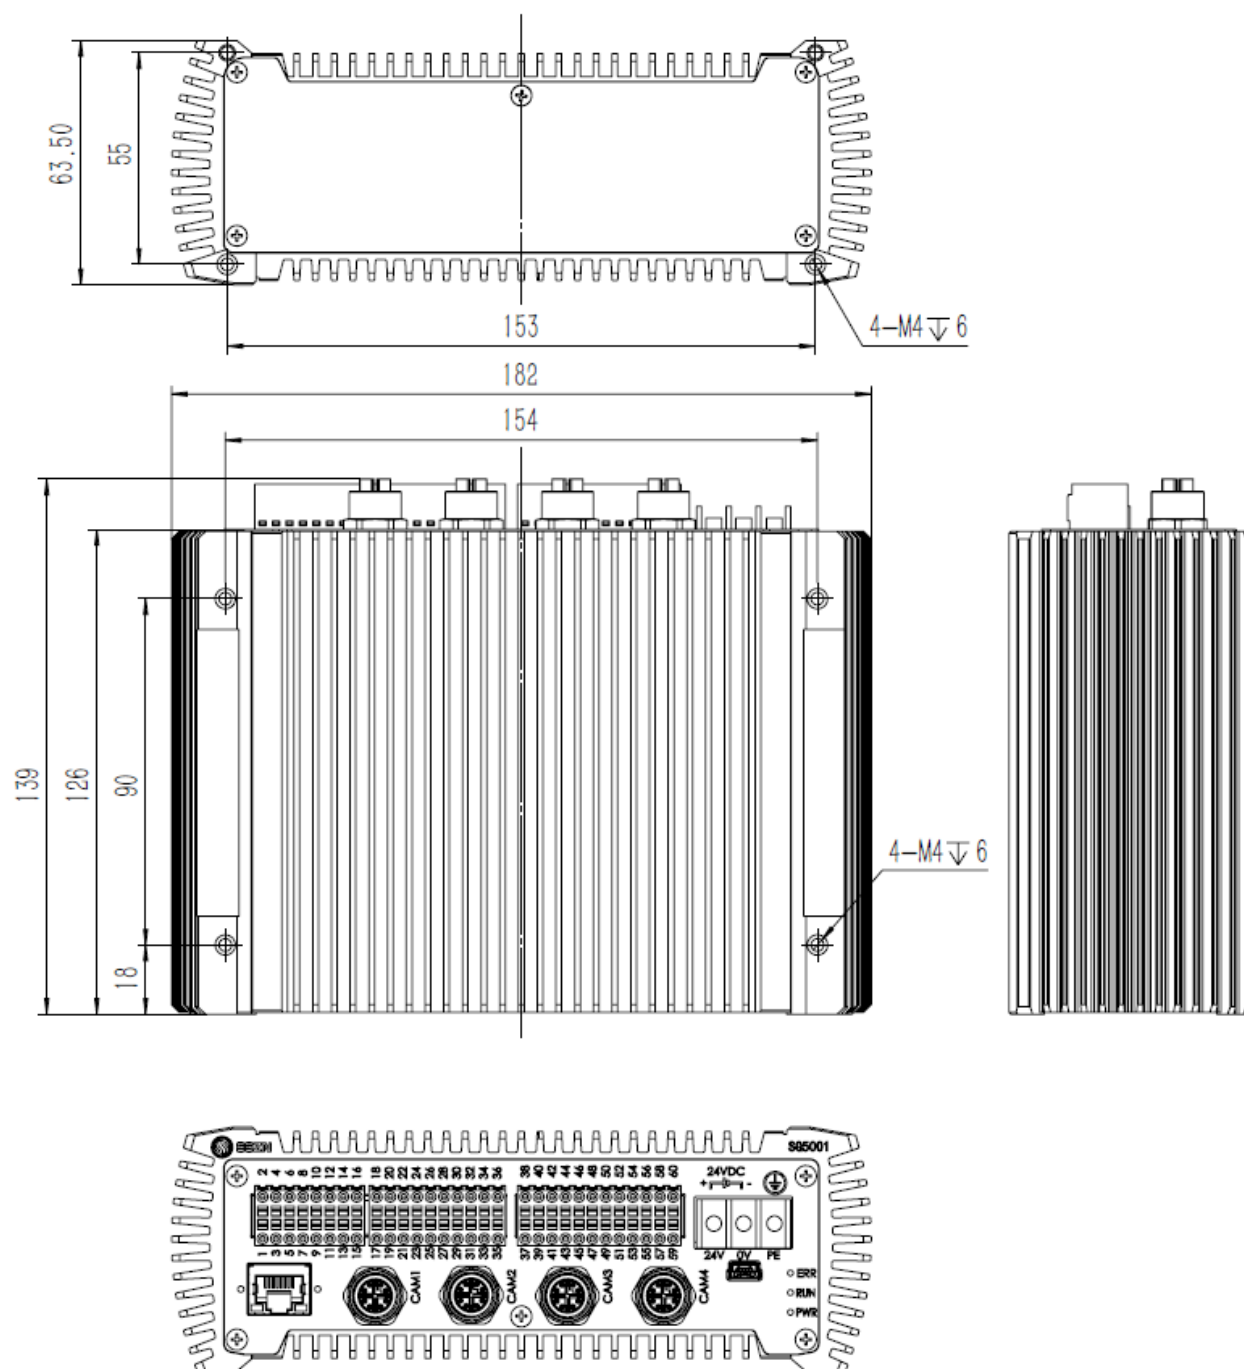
SG5001 Controller Dimensional Diagram Unit (mm)
